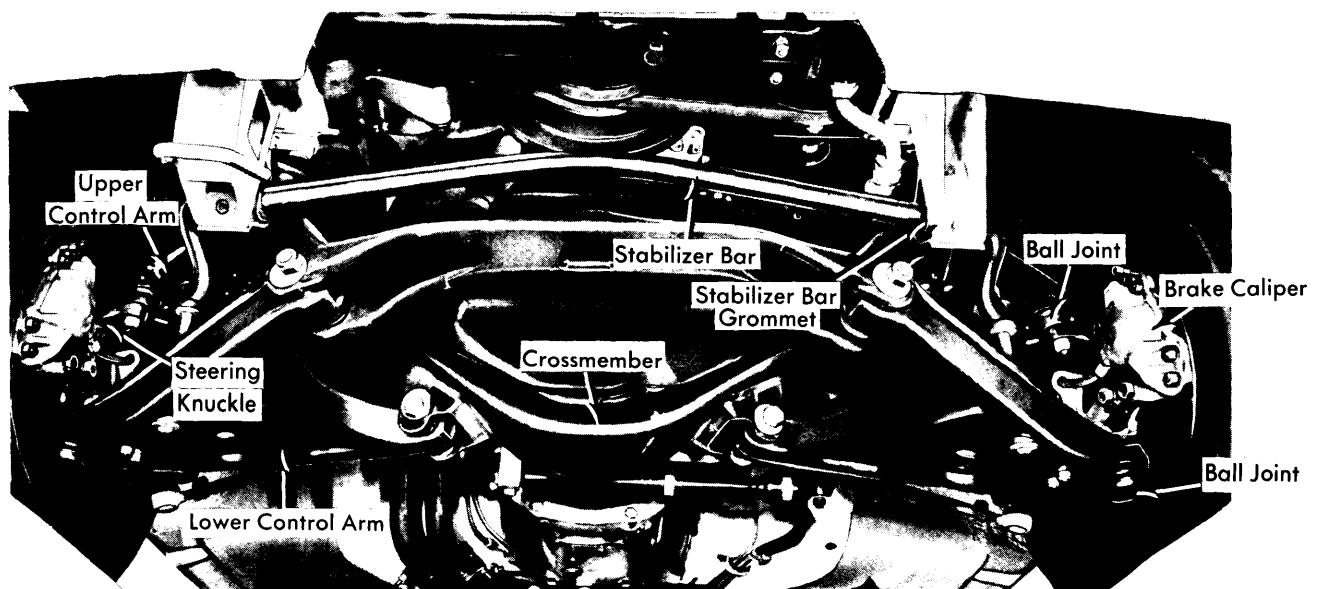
Head on View of Mercedes Benz 280 Front Suspension
